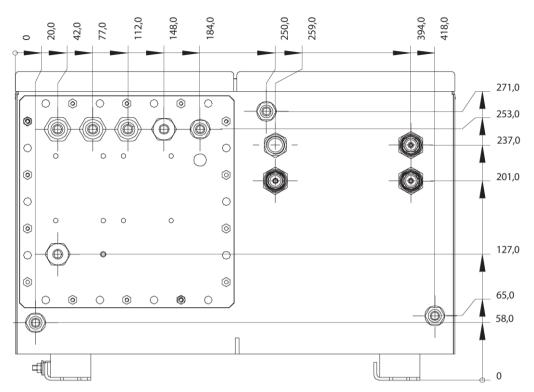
ULTRAMAT 6F and OXYMAT 6F, dimension drawing: Bottom view
